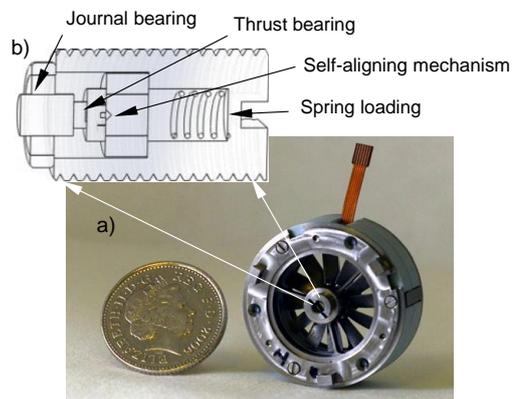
a) Photograph of turbine energy harvester [12], b) drawing of bearing and housing.
